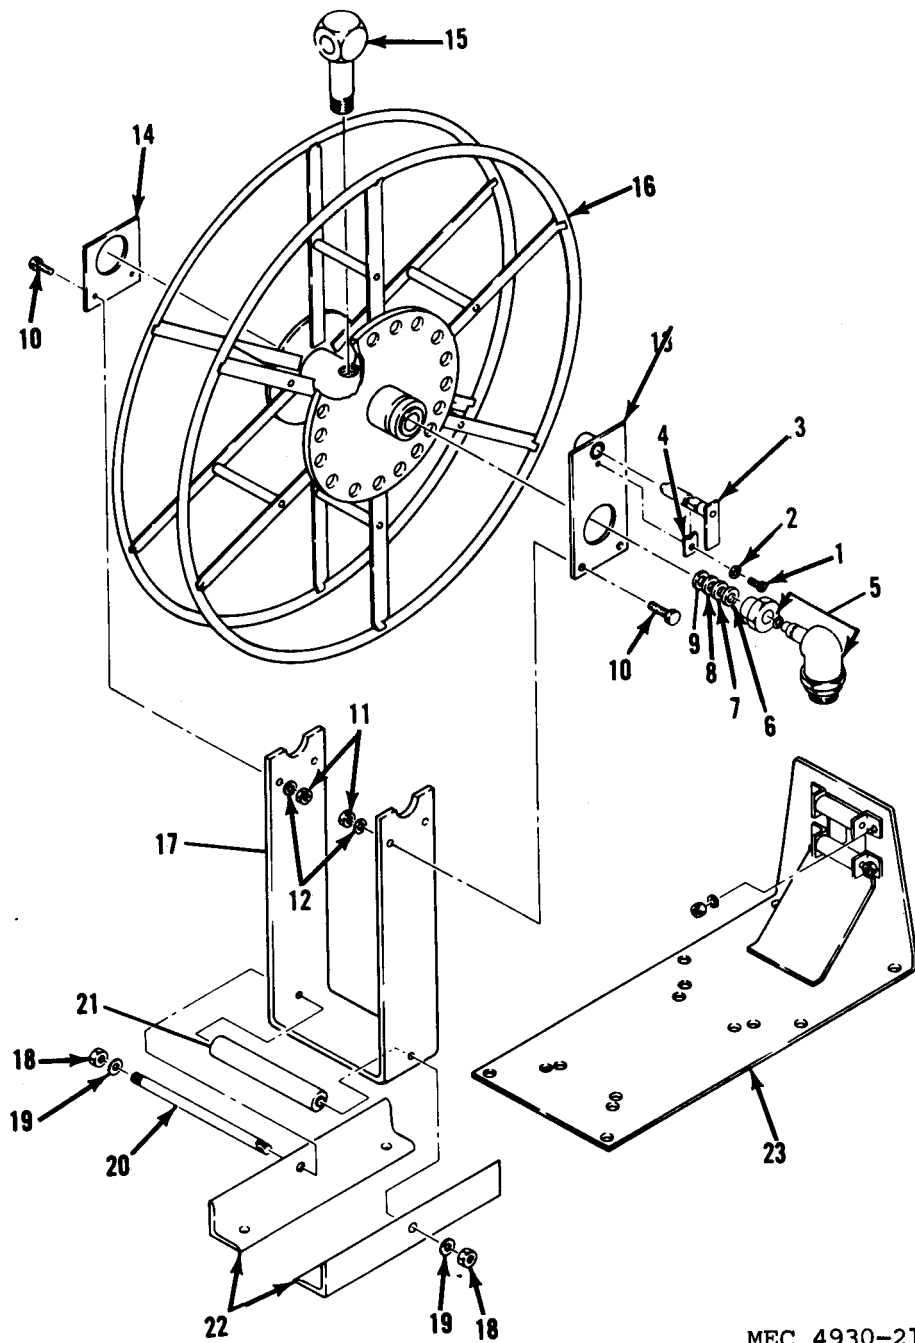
Chassis, gear and engine oil reels (used only on Serial Numbers 69-29737 through 69-29948).
